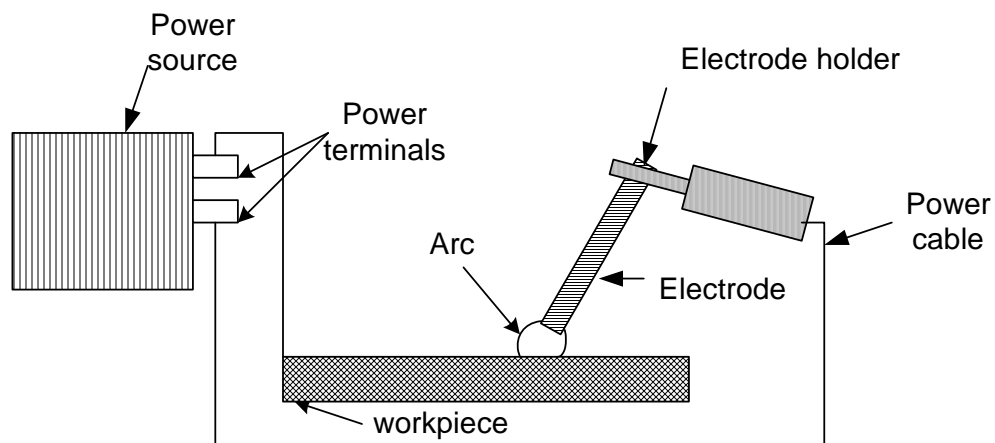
Schematic diagram showing various elements of SMA welding system
